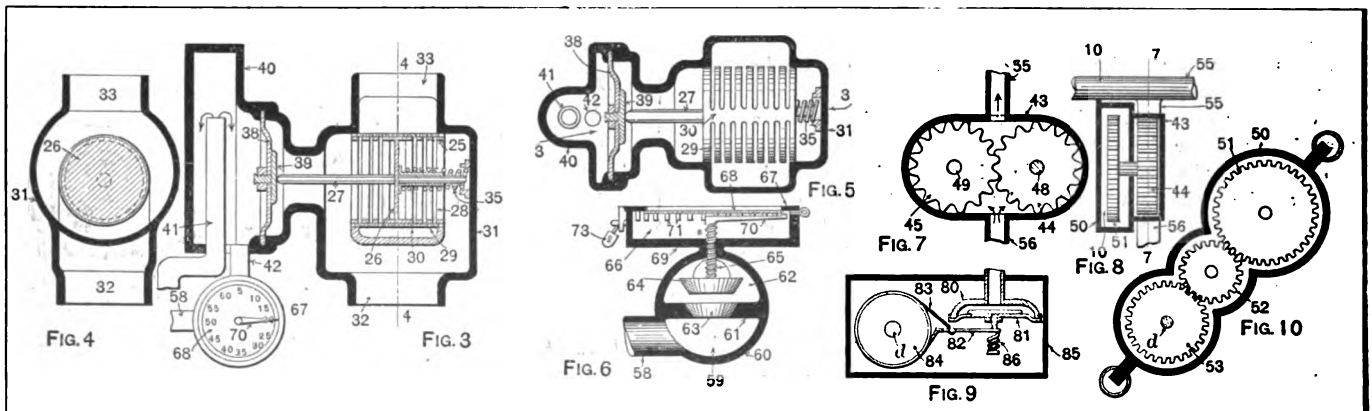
Sectional detail of throttle valve and operating mechanism. Fig. 4—Cross section on line 4-4. Fig. 5—Partial plan and section of throttle valve. Fig. 6—Showing details of the speed regulating device. Fig. 7—Section on line 7-7. Fig. 8—Details of the liquid pump. Fig. 9—Sectional detail of liquid-pressure brake. Fig. 10—Section on line 10-10, Fig. 8.
